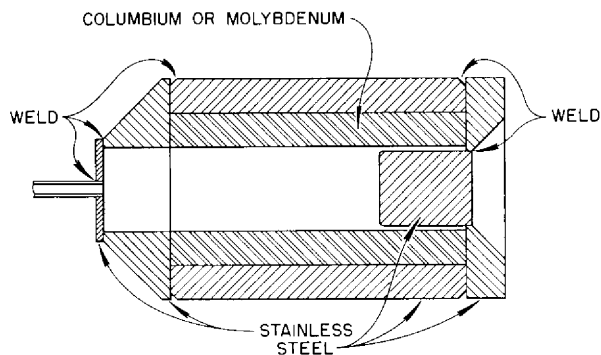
Billet Design for Extrusion of Stainless-Steel-Clad Refractory-Metal Tubing.
